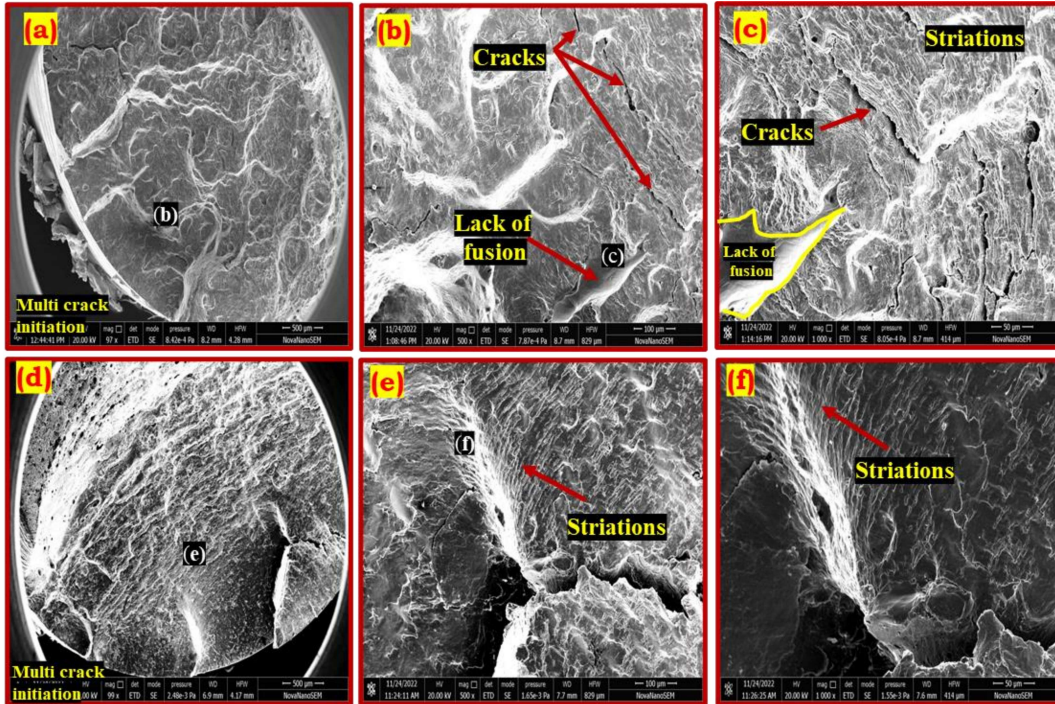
Fractographs of fatigue tested samples: (a-c) 90° AB and (d-f) CM sample.
